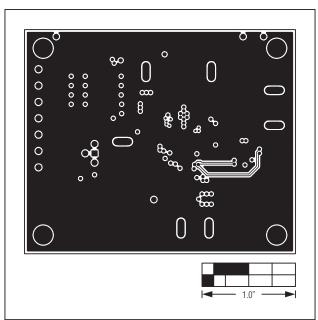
MAX17019 EV Kit PCB Layout—Layer 2
